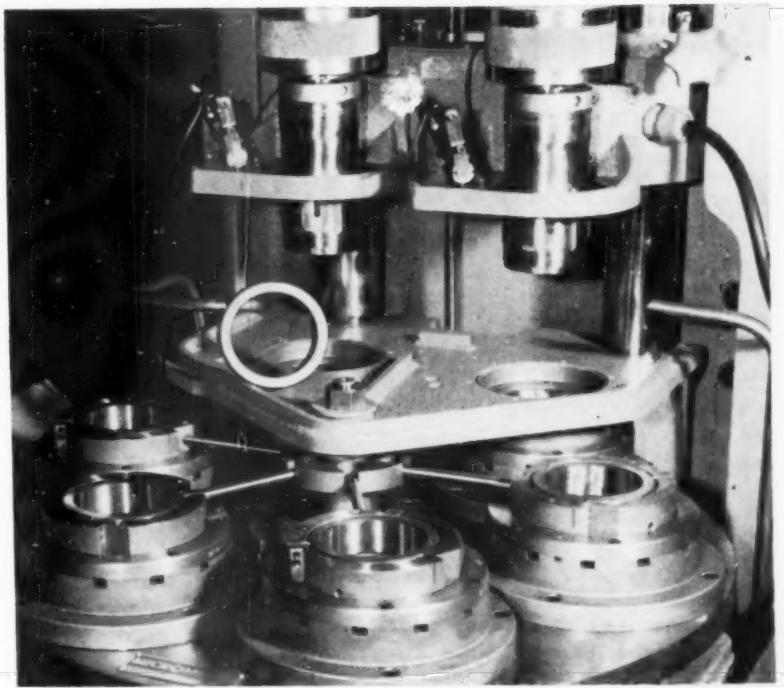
Six-position rotary index honing fixture with automatic clamping. Two operations, rough and finish, are performed in successive positions during the cycle.
